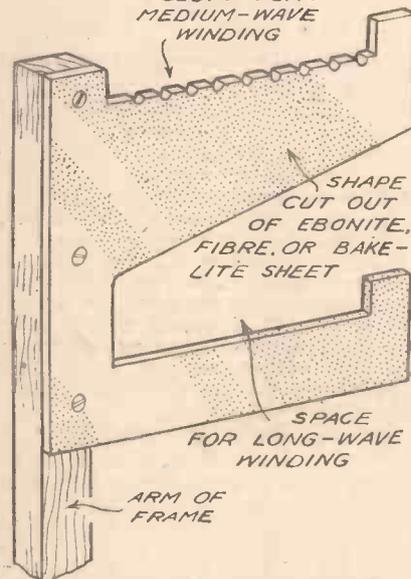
One method of fixing insulating strips for supporting the frame aerial windings.
